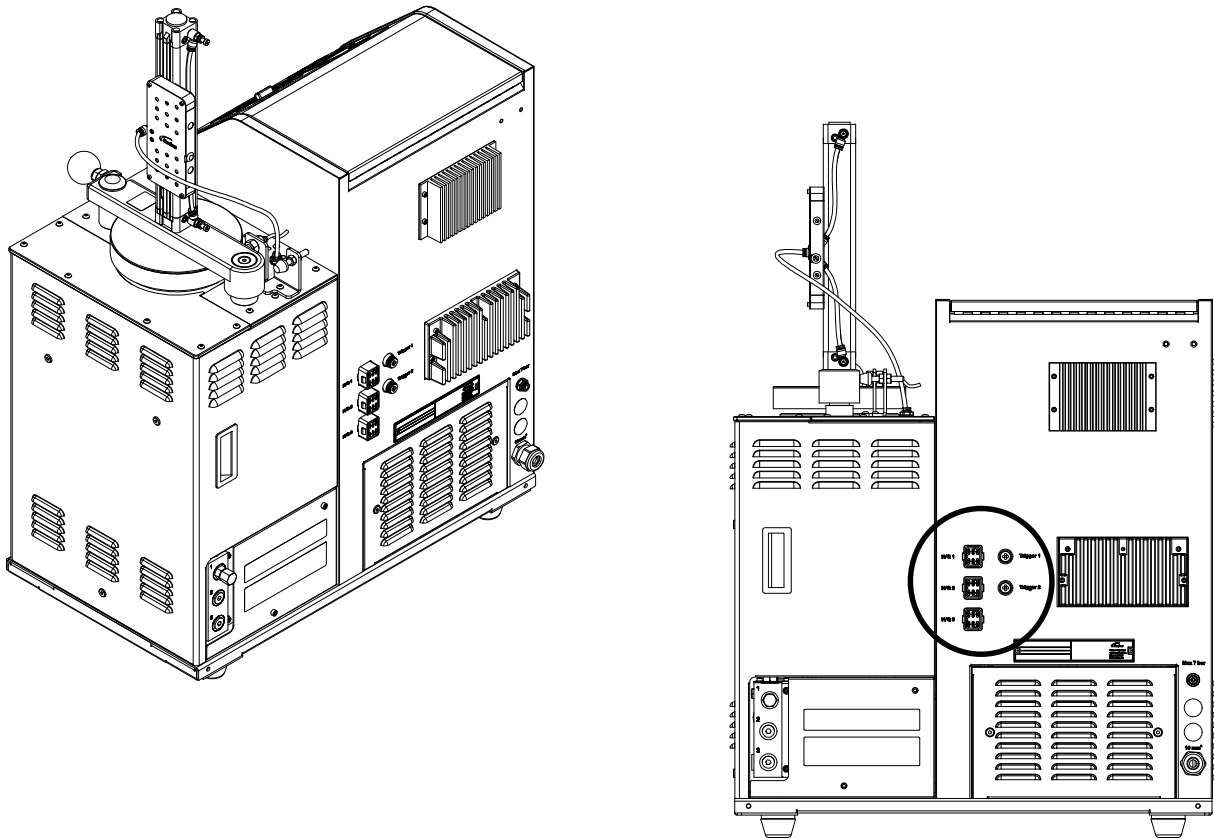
Connecting a switched hand-held applicator hose or footswitch
